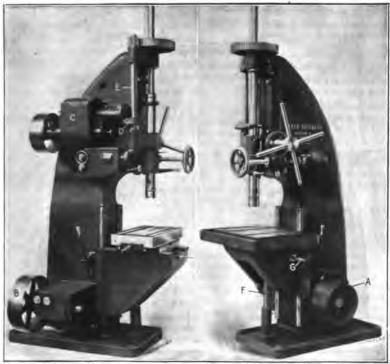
Baker Bros. High-duty Type of Drilling Machine
